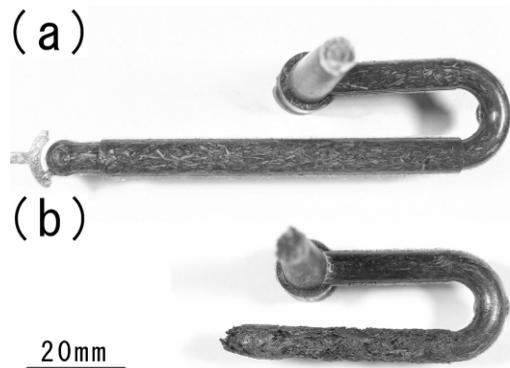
Appearances of injection molding composites (a) at 185 °C, and (b) at 220 °C. The perpendicular part is the sprue and the horizontal part is the specimen part.
